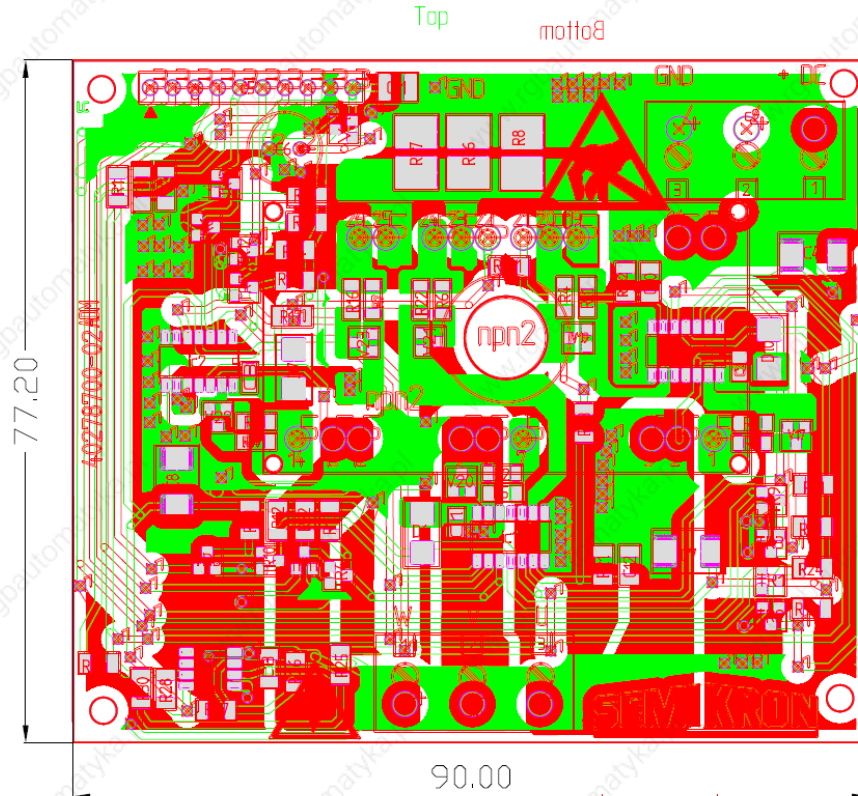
SEMITOP®3 PCB outline dimensions
